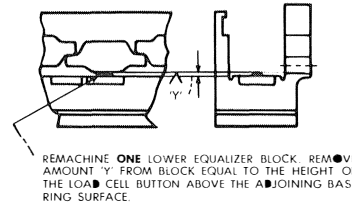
Load Cell Installation in Self-Equalizing Thrust Bearing.
